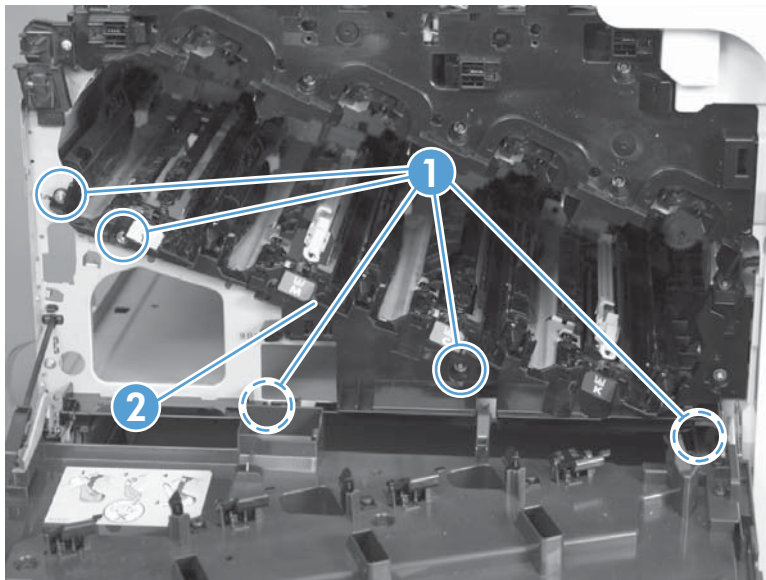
Remove the laser/scanner assembly (C/Bk) (2 of 5)
